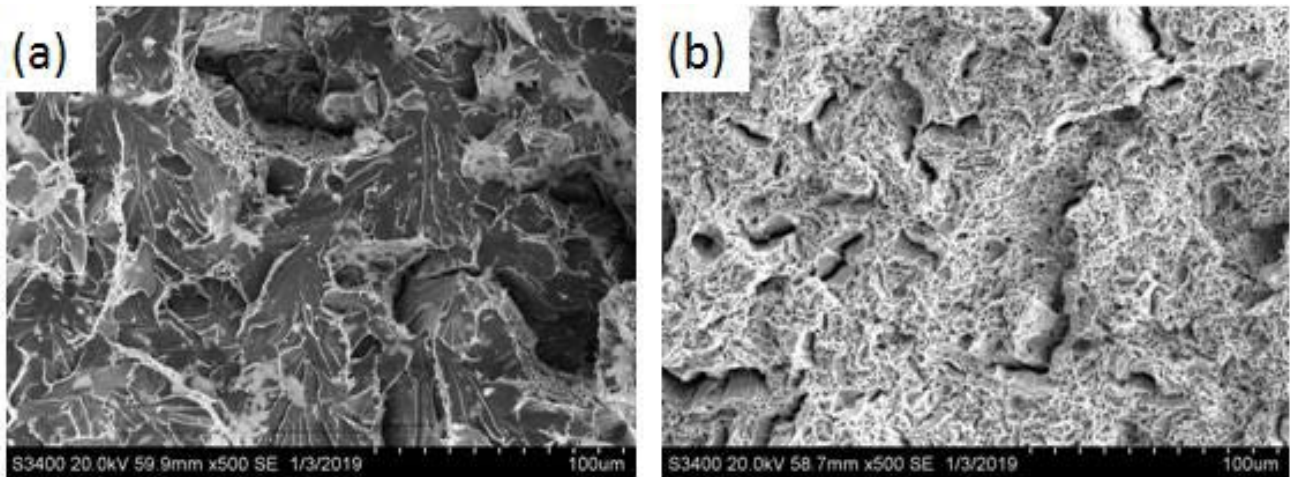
Fractography of room temperature tested samples (a) Impact sample (b) Tensile sample.
